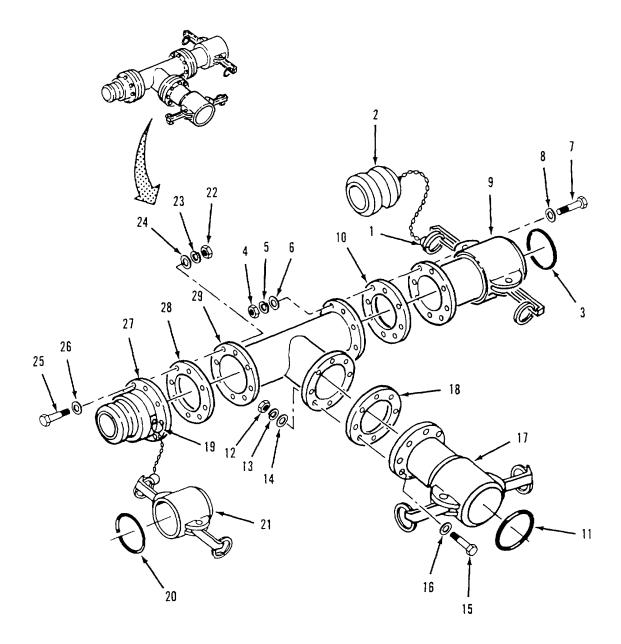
Tee Assembly (9115-Y) Disassembly.
